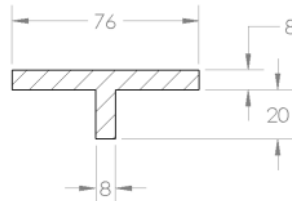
The cross-sectional area of a test specimen below the weld toe (Mosbron 2022)
